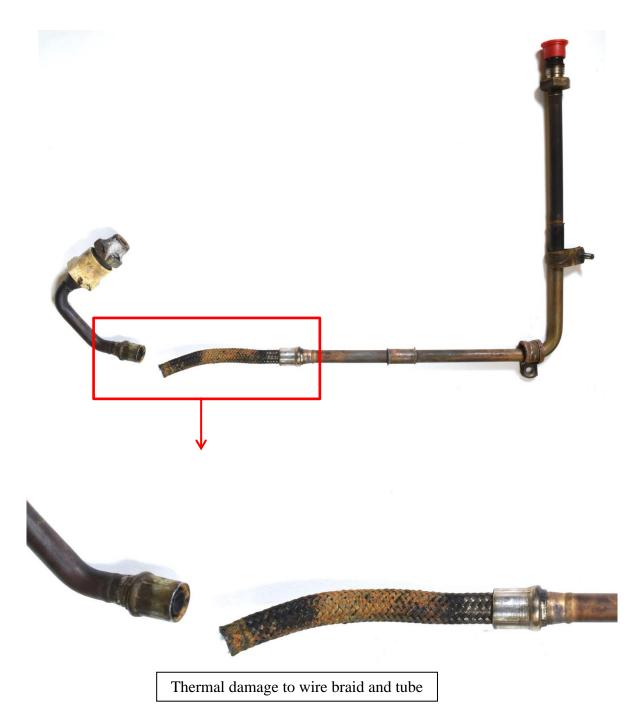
Images of the SVA hose and tube assembly in the as-received condition.
